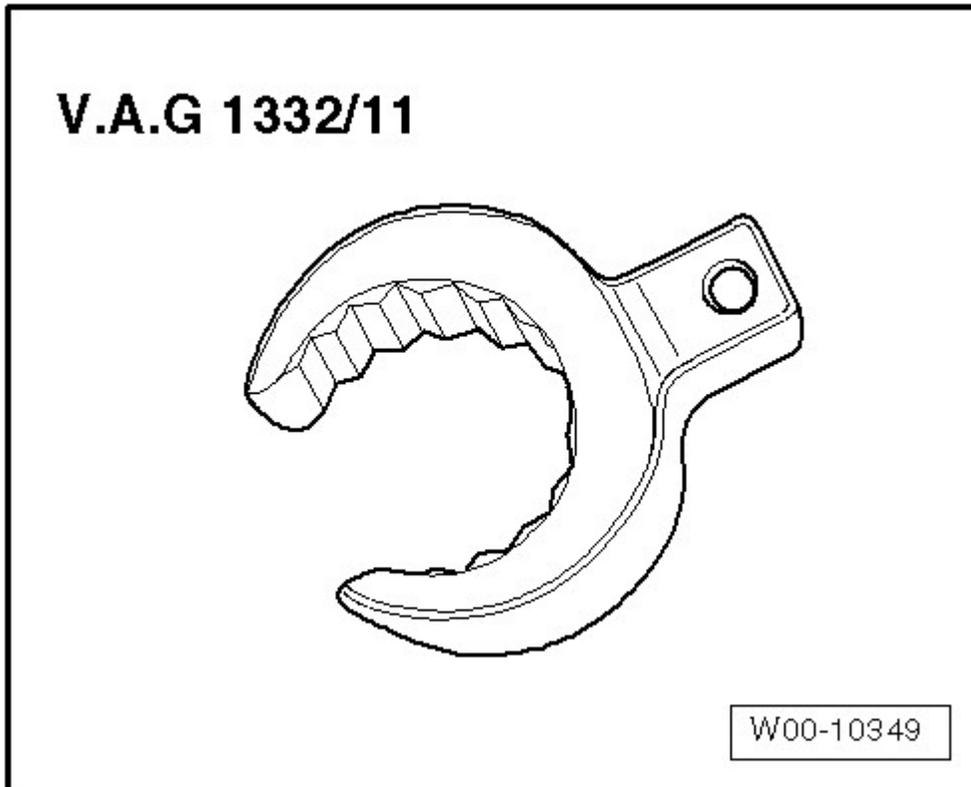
Identifying Tool 24 V.A.G 1332/11
